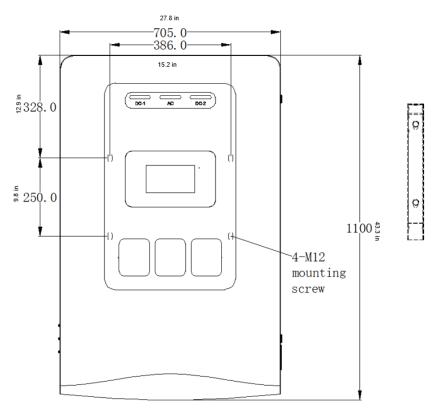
ICE-44 V2X Back Hole Dimensions
